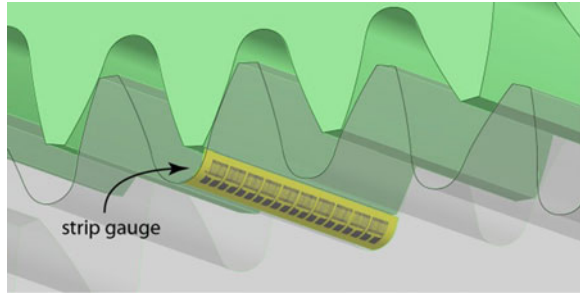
Strip gauge positioning at the root of a test gear tooth
